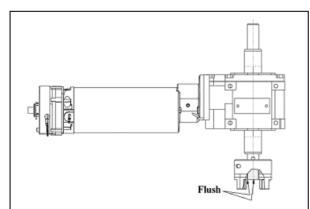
CLAMPING HUB POSITION ON GEARBOX SHAFT
